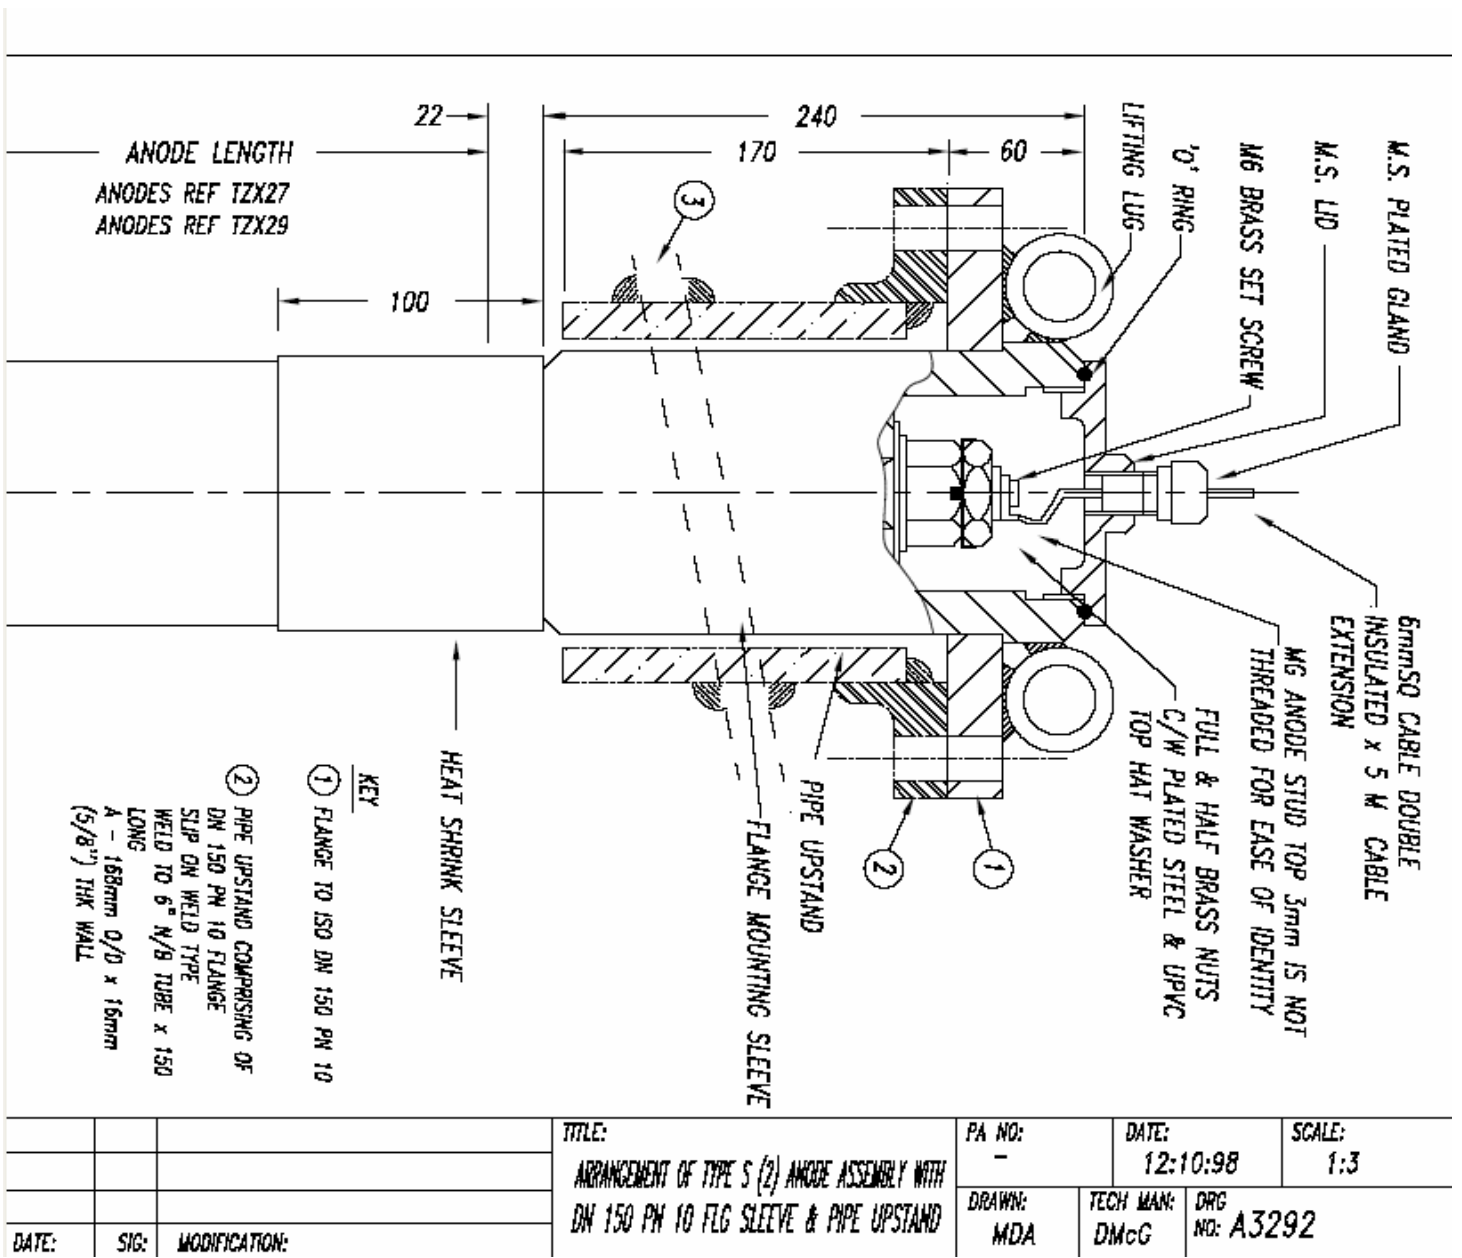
Section view of installed anode. Gasket and flange fasteners are not shown.
